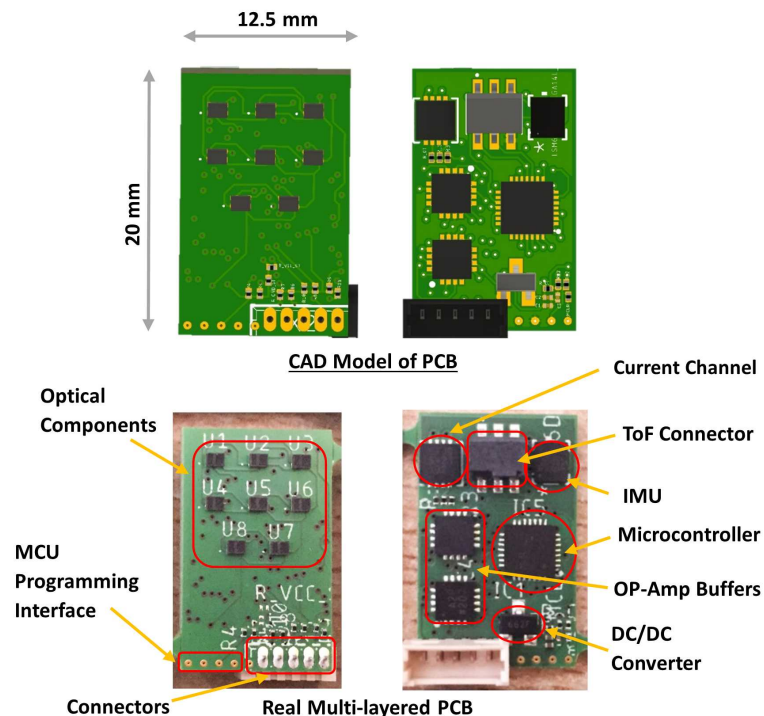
Multi-layered PCB with Front View on Left Side and Bottom View on Right Side
